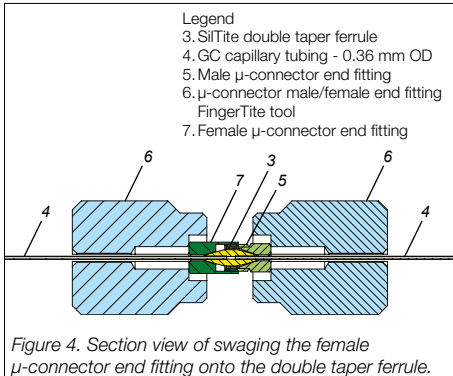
Section view of swaging the female  $\mu$ -connector end fitting onto the double taper ferrule.
